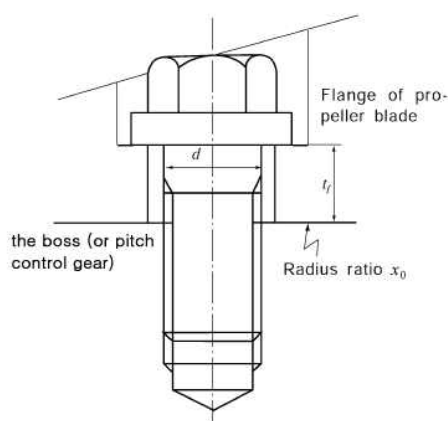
Measuring Method of Blade Fixing Bolt Dimension
